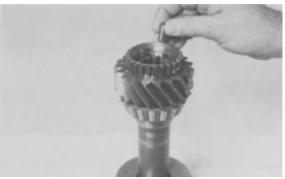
Press new taper bearing on drive gear. Turn gear over. Using a high quality heavy grease, coat roller bearing surface. Place rollers in grease as shown.
